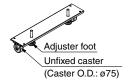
Caster adjuster-foot bracket (2 pcs.)
